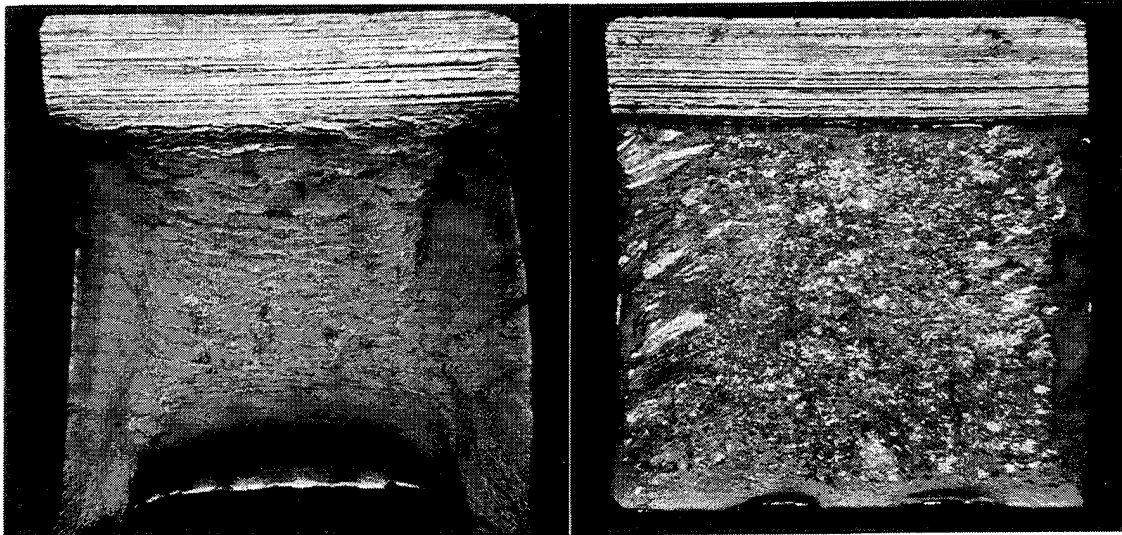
MV4 Ductile and Brittle Fracture Surfaces (6.4 x)
